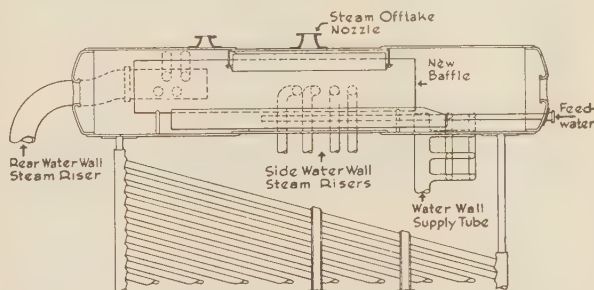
LONGITUDINAL SECTION No. 10-C AND No. 10-D BOILERS, SHOWING LOCATION OF STEAM RISERS AND STEAM-DRUM BAFFLING
